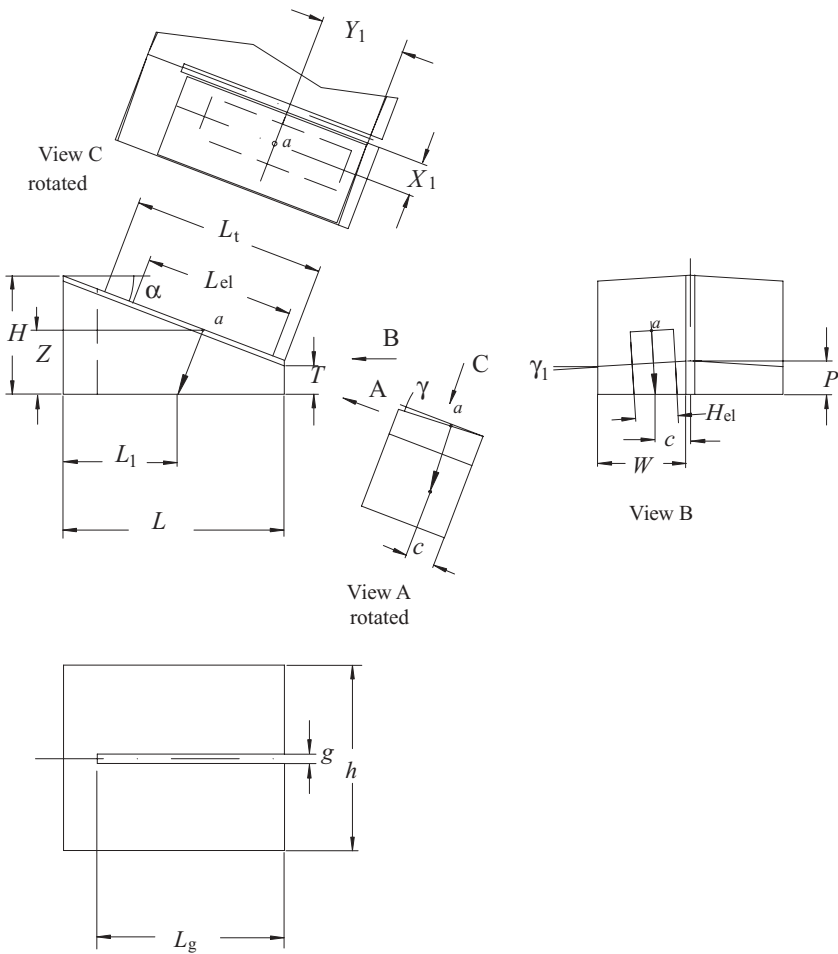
Geometrical parameters of the wedge with a flat footprint.
